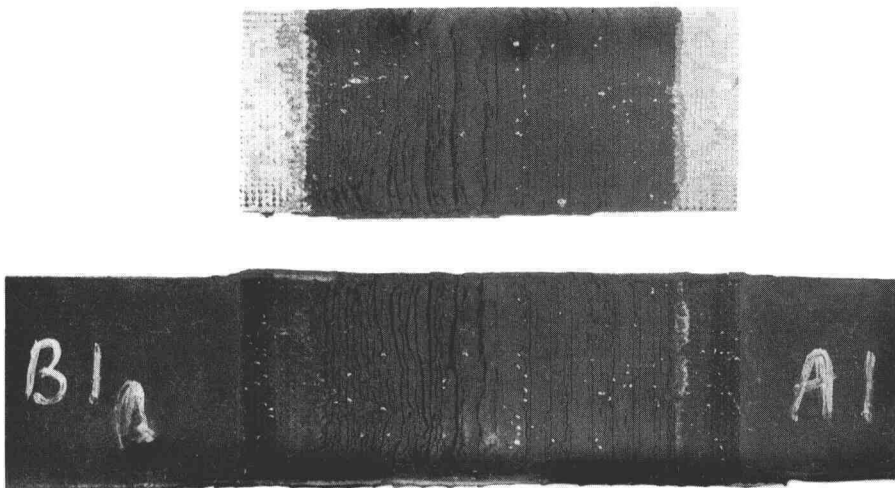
Test sample showing different types of bond failure with machined metal plate.
